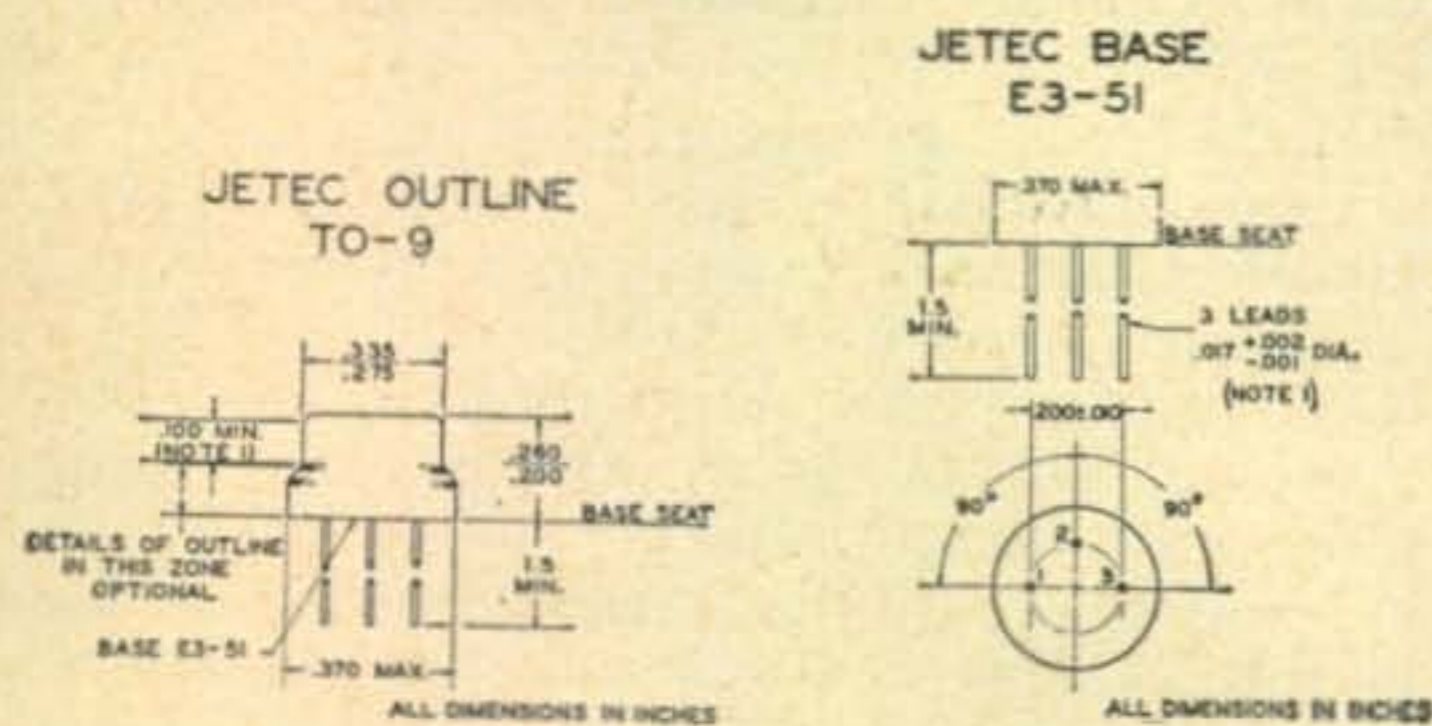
Outline dimensions for the JETEC TO-9 and E3-51 transistor packages.
